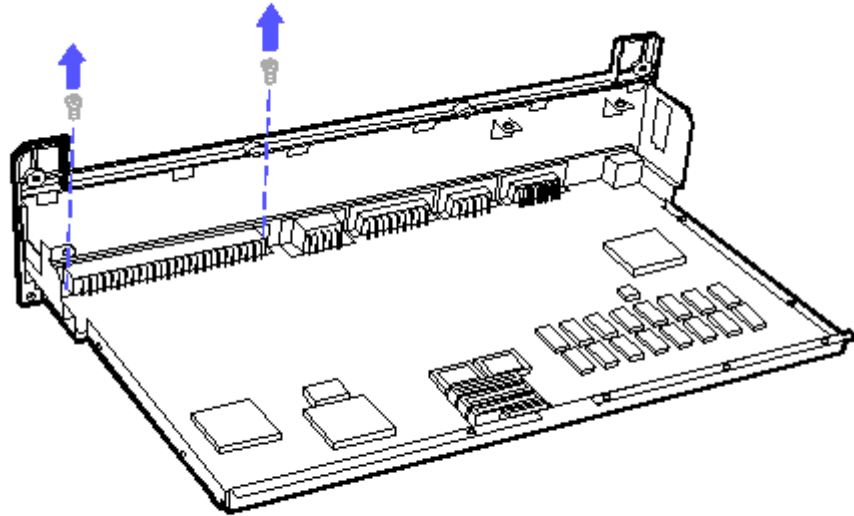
Removing Screws from the Expansion Base (J101) Connector
